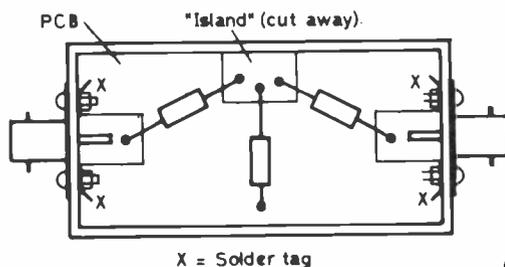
SINGLE STAGE ON "ISLAND" TYPE PCB
